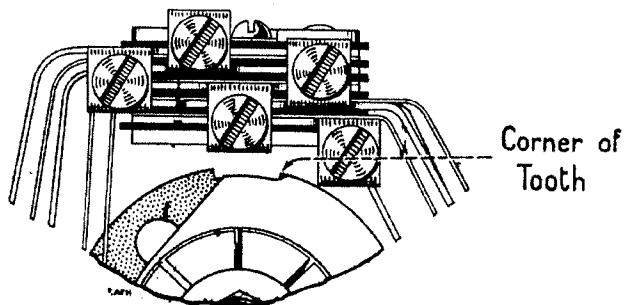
CHECK OF ADJUSTMENT OF SLIPPING CAM
